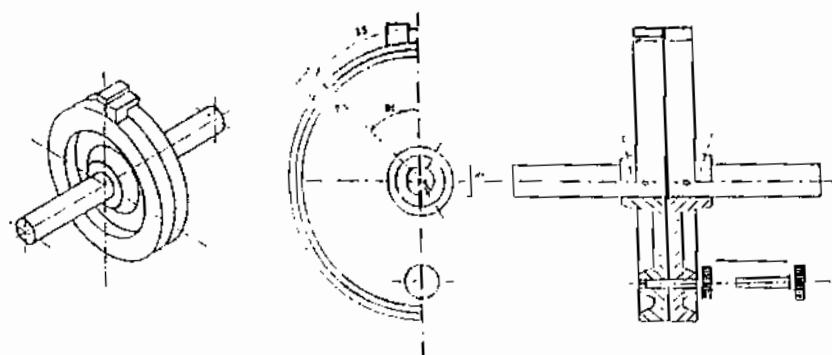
Specially designed fixture and clip gauge assembly for measurement of twist angle.
